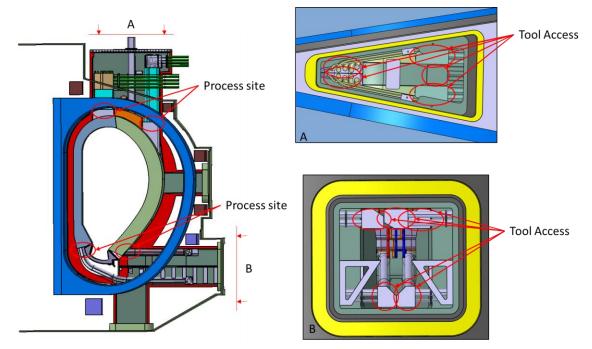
Pipework cut and weld site locations within a fusion reactor: a. Blanket service pipe & b. Divertor service pipes.
